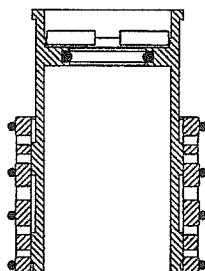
LUBRICATED APA VALVE ASSEMBLY
